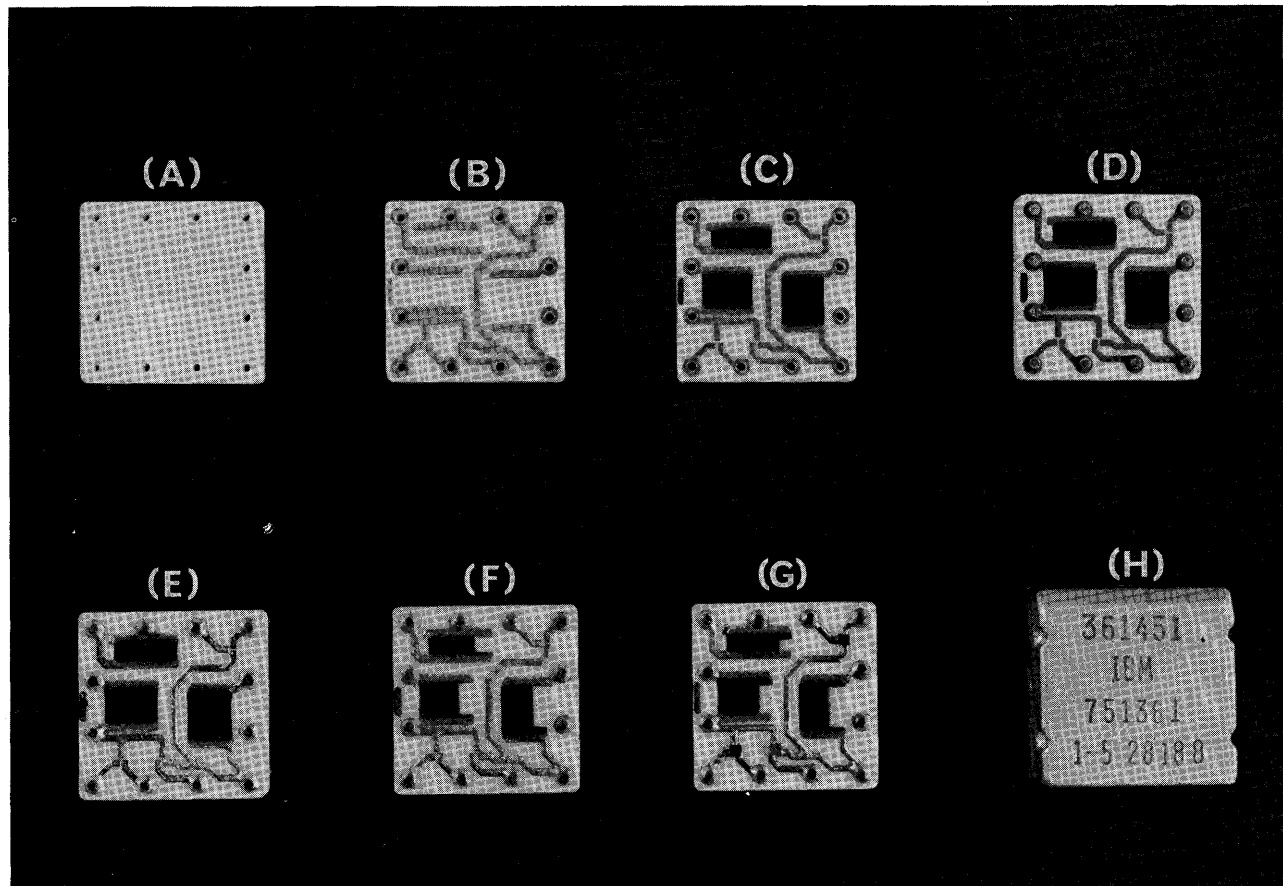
Steps in SLT module fabrication; (A) bare substrate, (B) print circuit pattern, (C) print resistors, (D) insert connecting pins in holes, (E) dipped into solder, (F) trim resistors, (G) attach chips, (H) encapsulate in metal shell.
